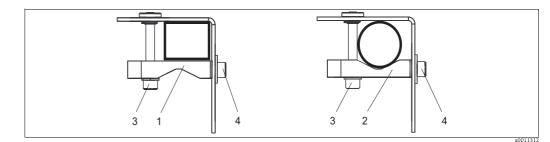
Installing the railing bracket, pendulum holder and immersion tube tray
